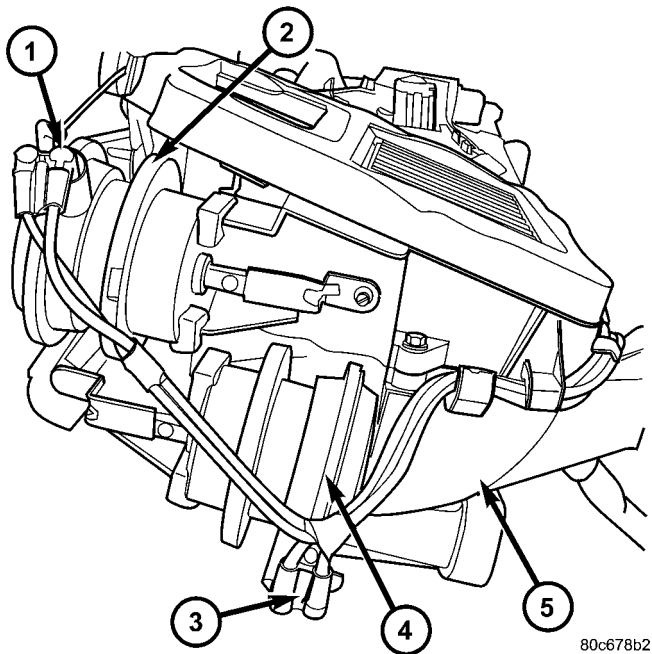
HVAC DOOR VACUUM ACTUATORS
